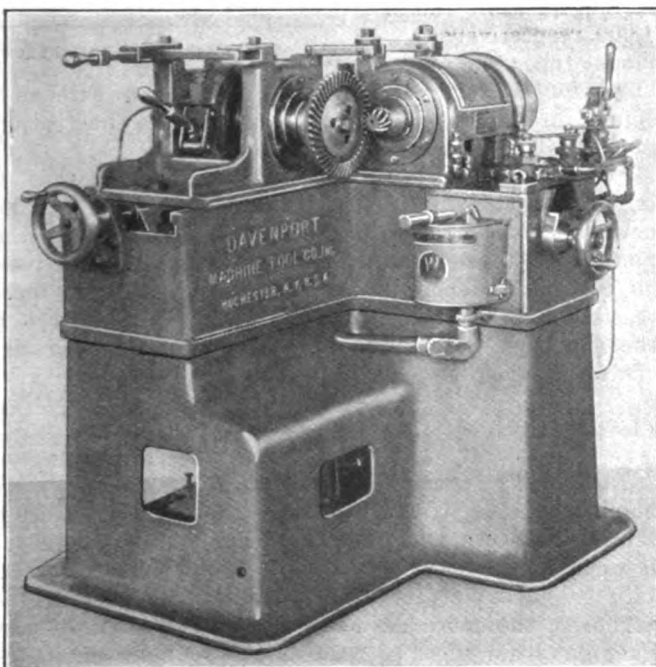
DAVENPORT BEVEL GEAR TESTING MACHINE
